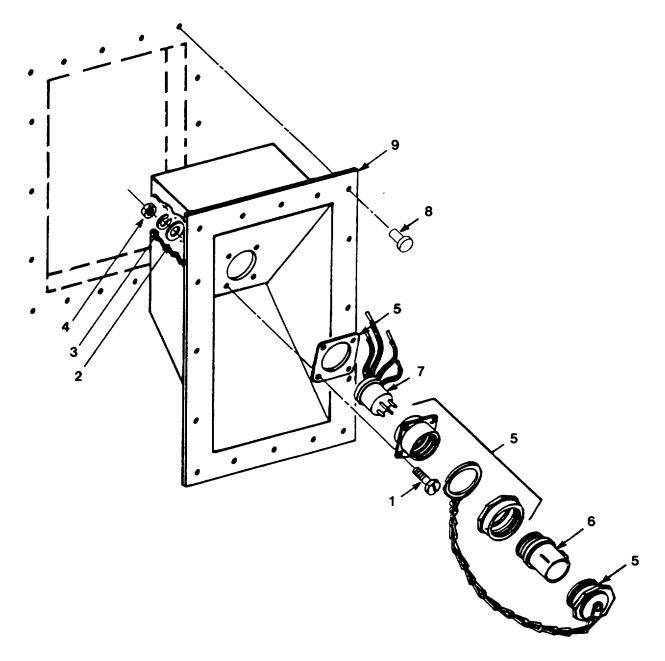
Main Power Receptacle Assembly (Sheet 1 of 2)
